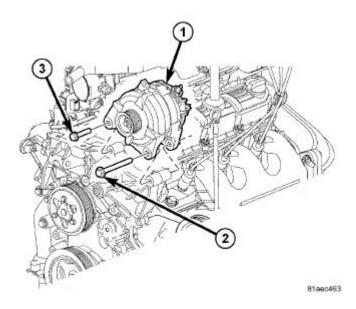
Removing/Installing Generator Courtesy of CHRYSLER LLC
